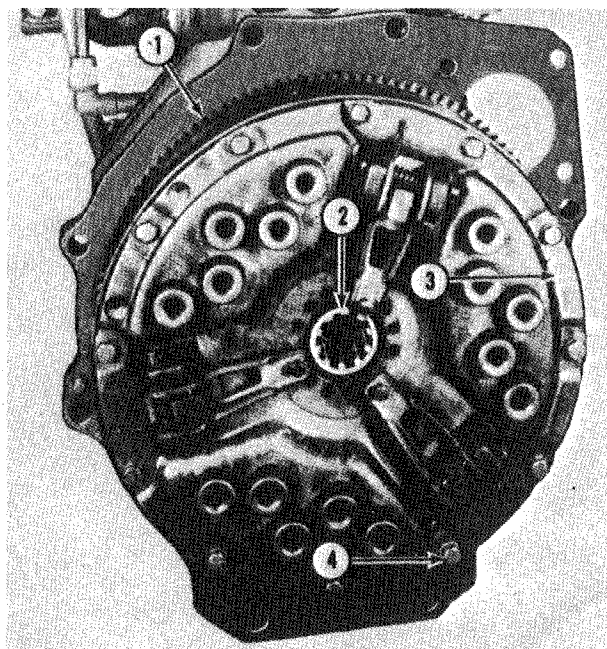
Assembled view of clutch and flywheel used on Models TW-20 and TW-30.
